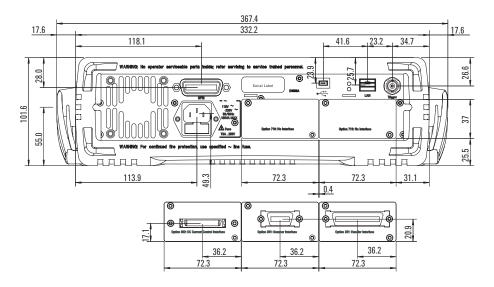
Dimensions (rear view, with handle and bumper, in millimeters, nominal)
